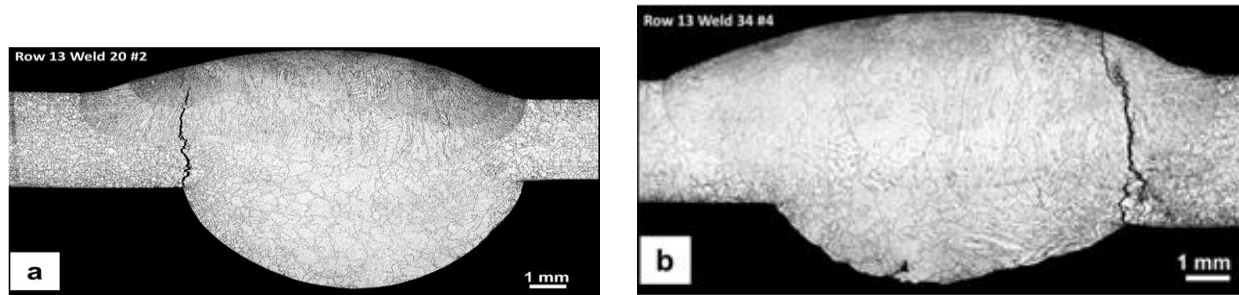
Cross-section of alloy 740H GTAW welds in post weld aged tubes of nominal dimension 38 mm OD x 5.5 mm W. OD of tube at top [22].
